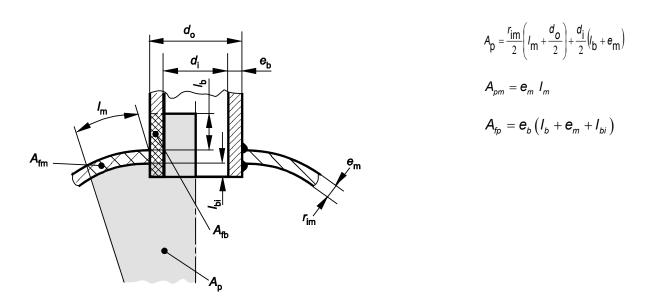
Design of openings — Cylindrical shells with isolated openings — Reinforcement by branches
